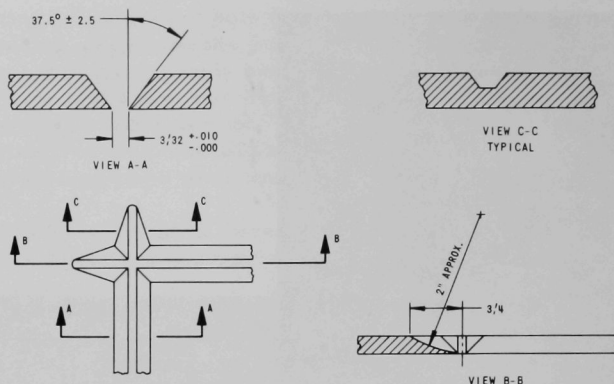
Details of Weld Joint for Use with Consumable Insert (Y-ring)
